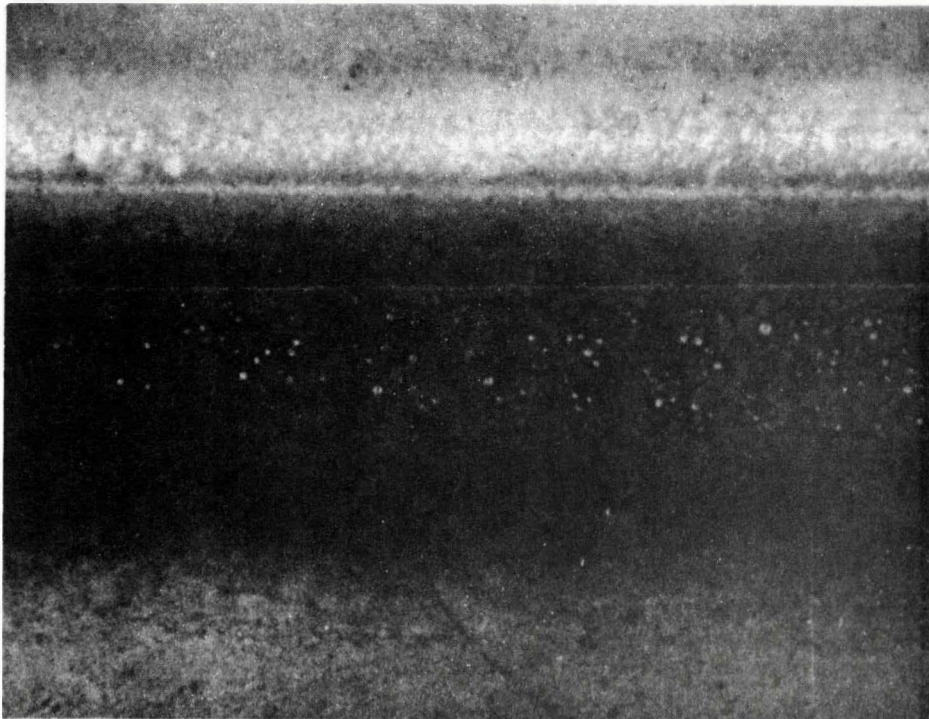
Example of Beaded Filler Metal Surface After Brazing with Ceramic Furnace Internals.
